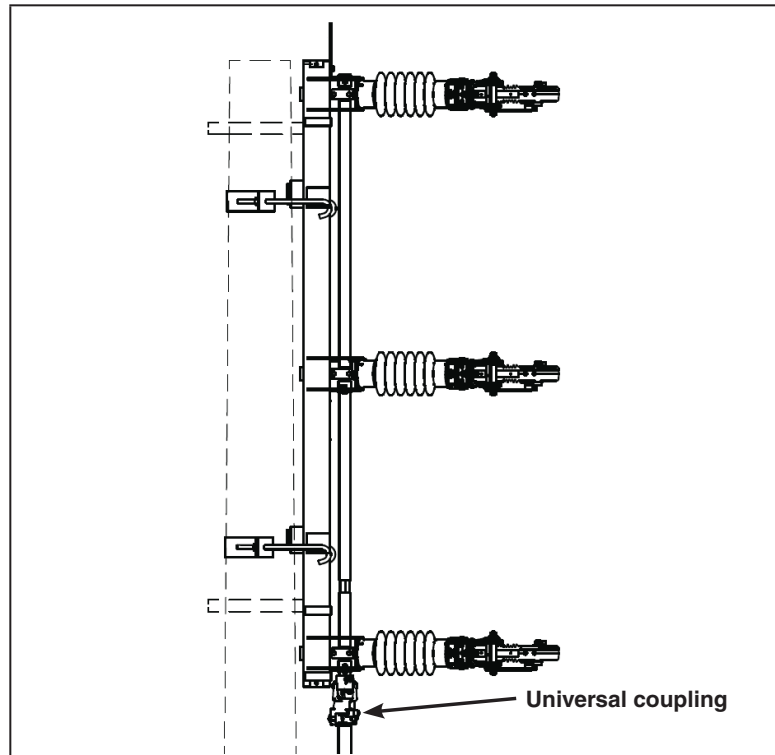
Connect the upper section of operating pipe to the universal coupling attached to the interphase operating shaft.
